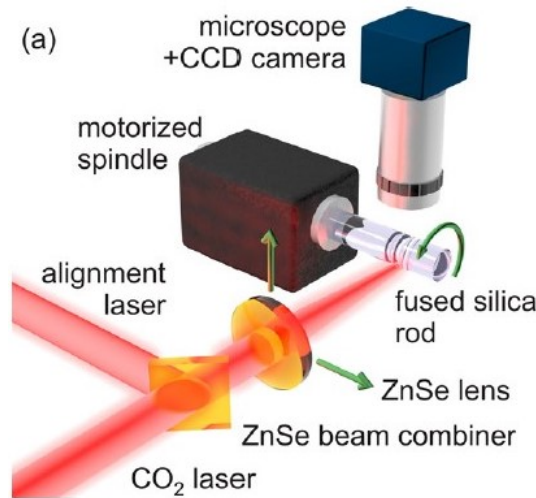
CO₂ laser machining of silica rods, from Del'Haye et al. [2].
